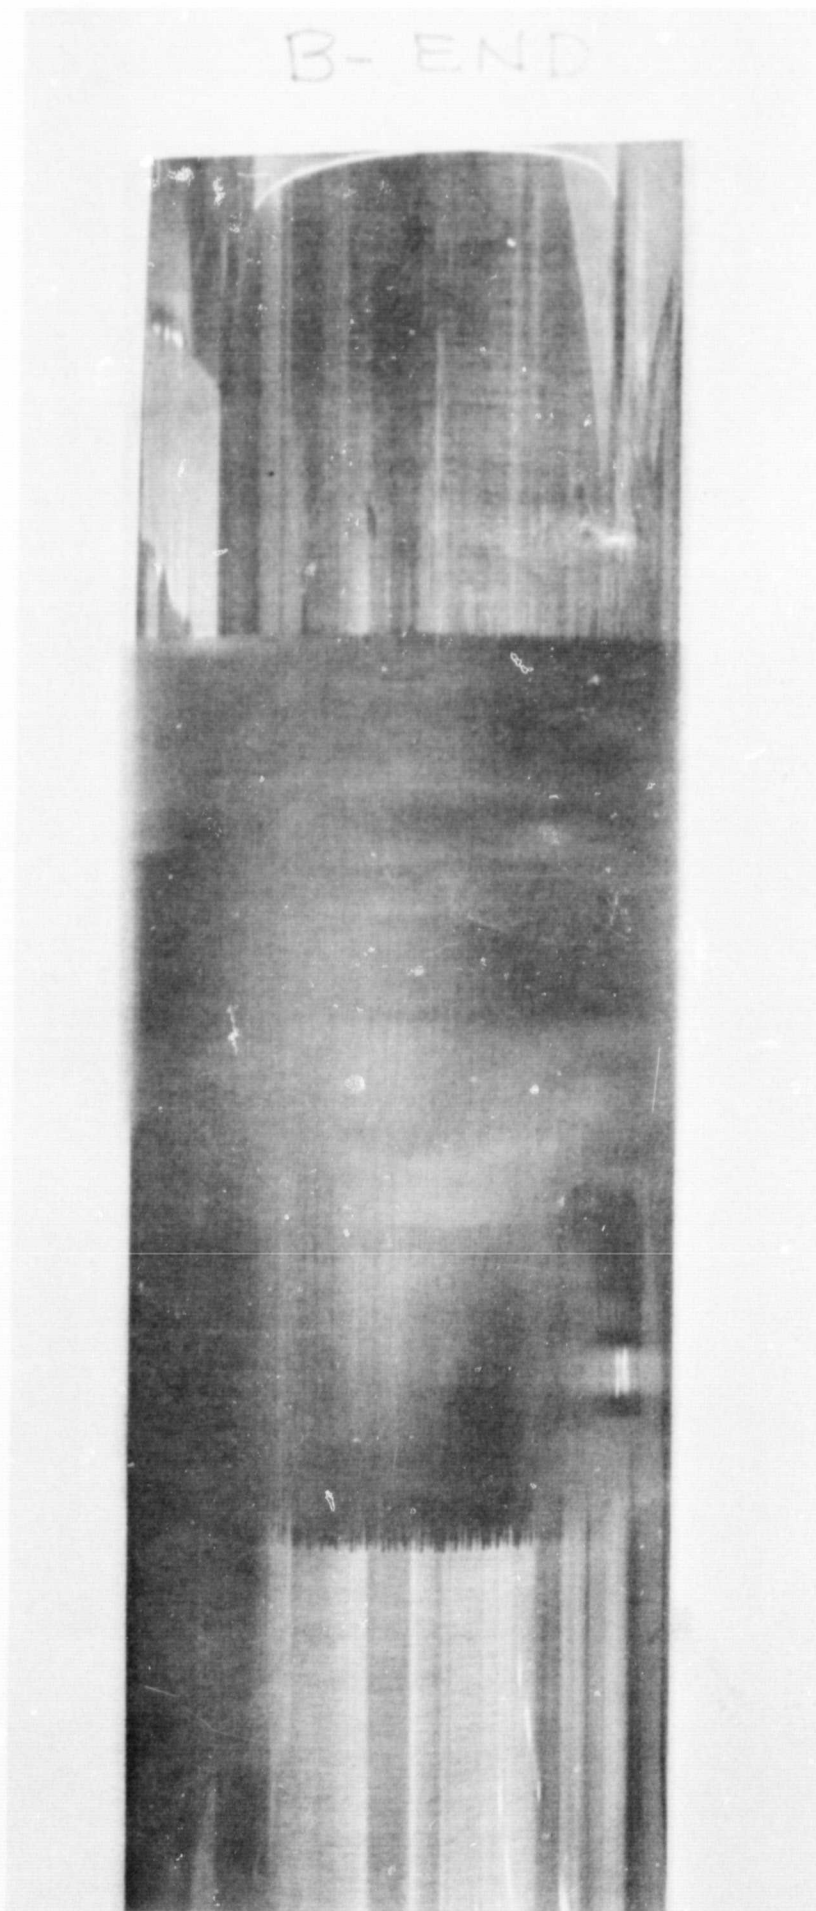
Piston Rod, B-End, Three-Inch Reed Seal
